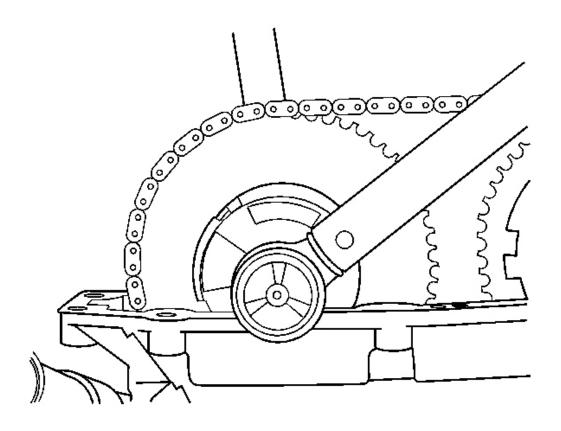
Tightening Exhaust Camshaft Sprocket Bolt Courtesy of GENERAL MOTORS CORP.
